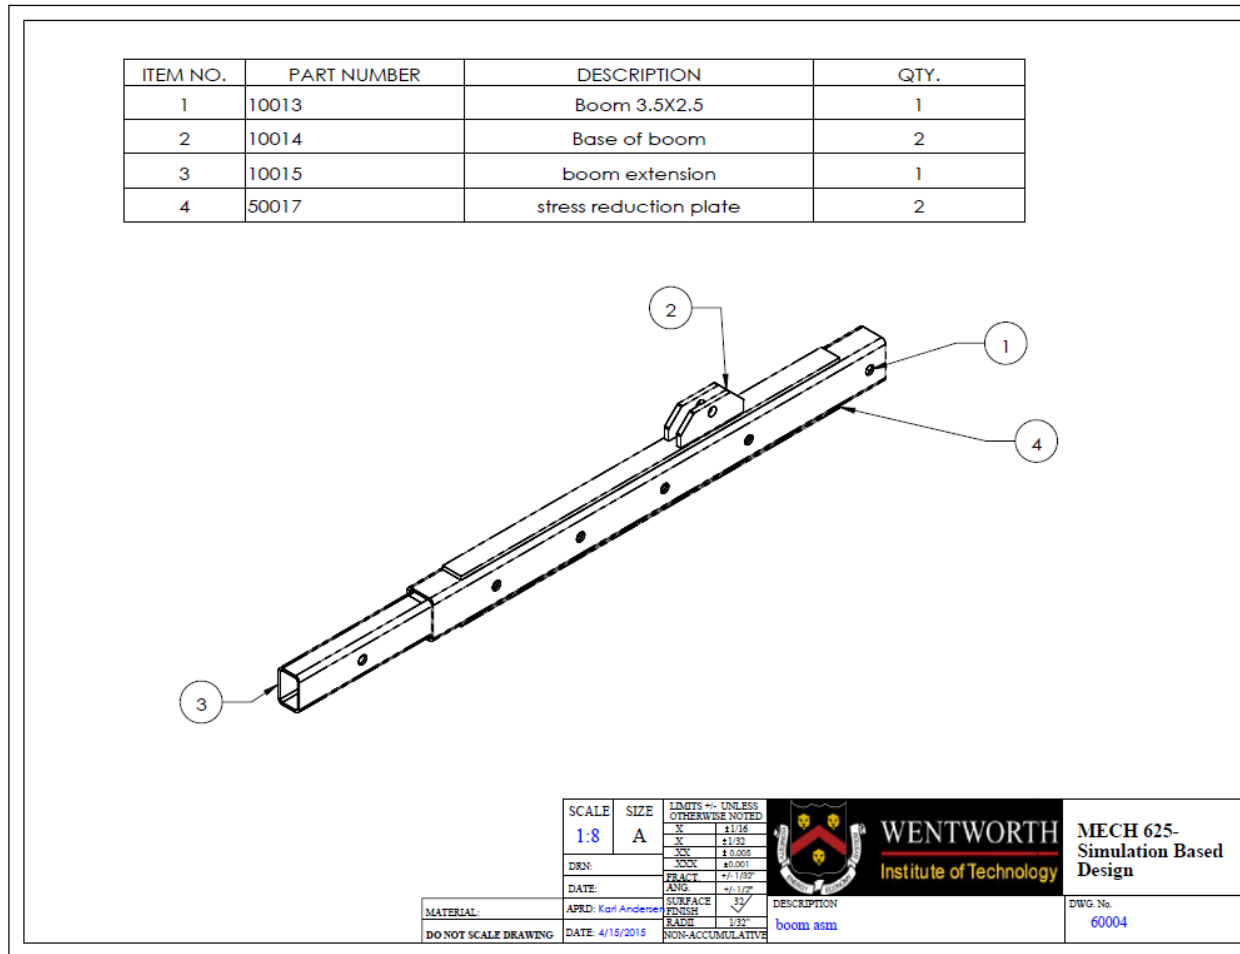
PN#60004 Boom Assembly Redesign Drawing with BOM
